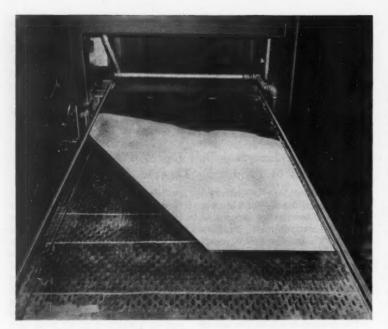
Close-up view of machine shown in Fig. 1 with wide abrasive belt in place over rubber-faced contact roll, and aluminum plate in work position
